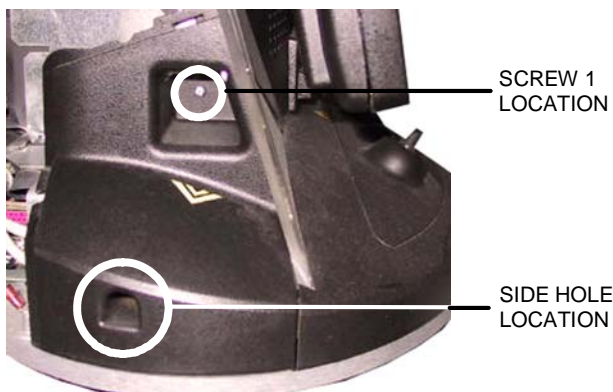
SIDE VIEW OF RIGHT WING HIP
